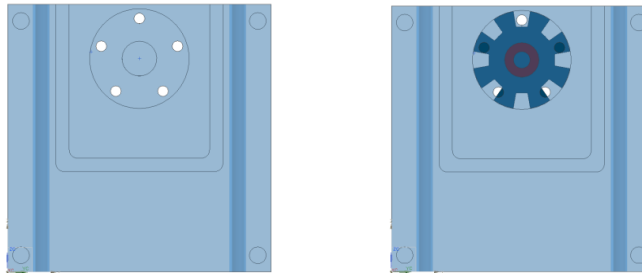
Five Port injector Plate and Five Port Injector Plate with Eight Tooth Valve
